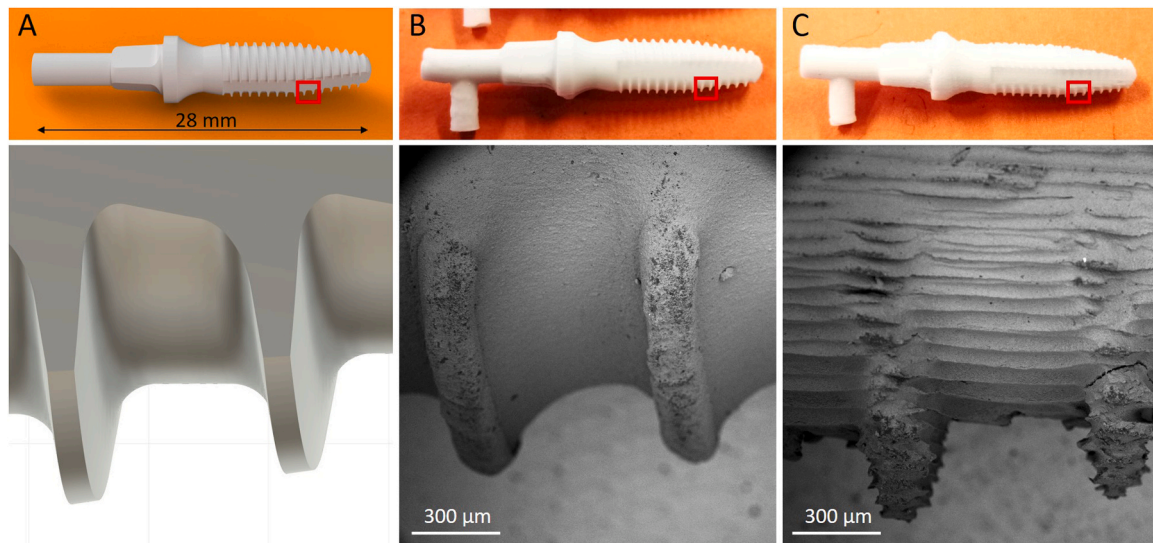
Comparison of a threaded part as CAD file (A) and sintered parts fabricated using an DLP resin mold (B) as well as FDM printed PVA mold (C).
